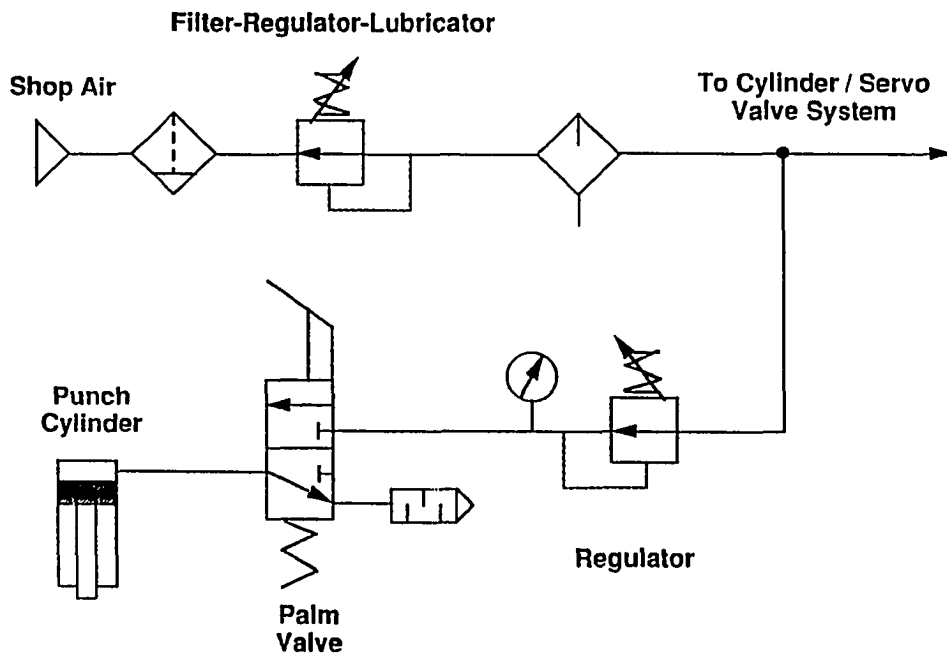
Pneumatic circuit for the ejector on the draw/reverse redraw tooling.
